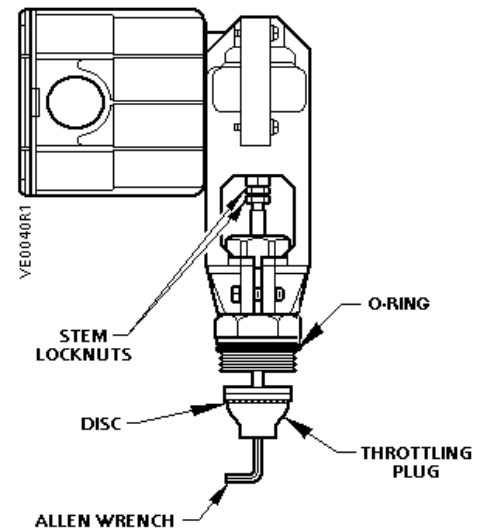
Removing the Throttle Plug on VE 339 Two-way Valve.
